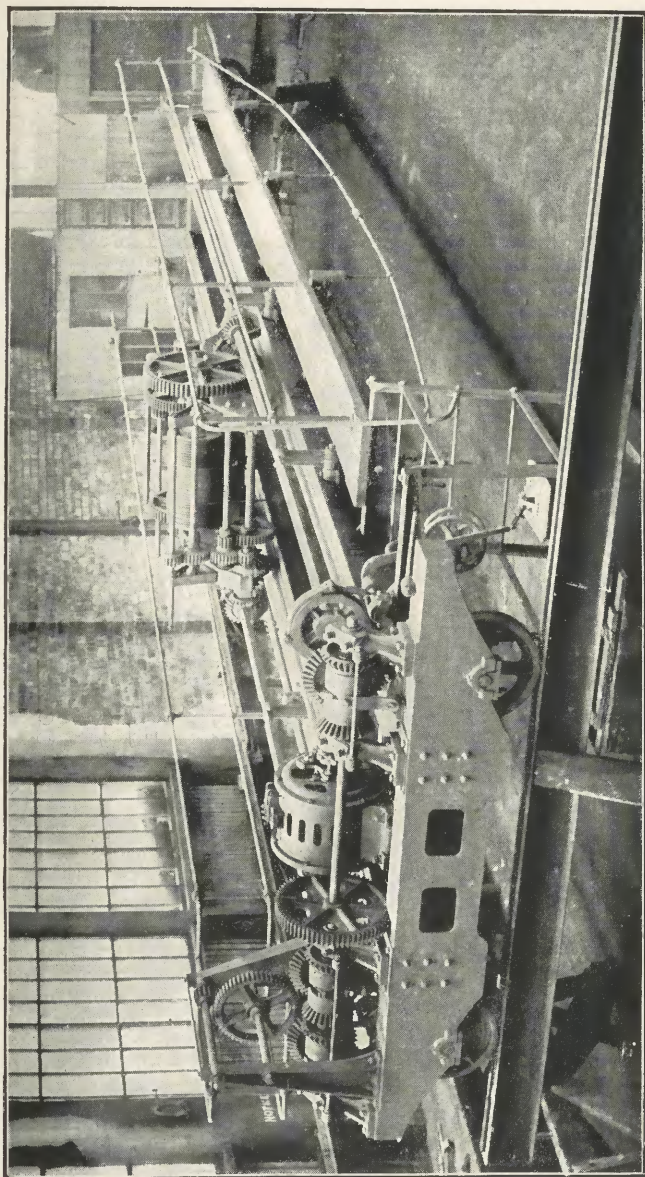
5-ton Single Motor Electric Overhead Travelling Crane.
